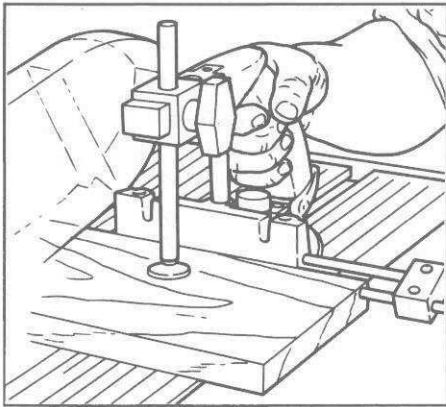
Crosscutting duplicate short lengths using a miter gauge stop-rod.
